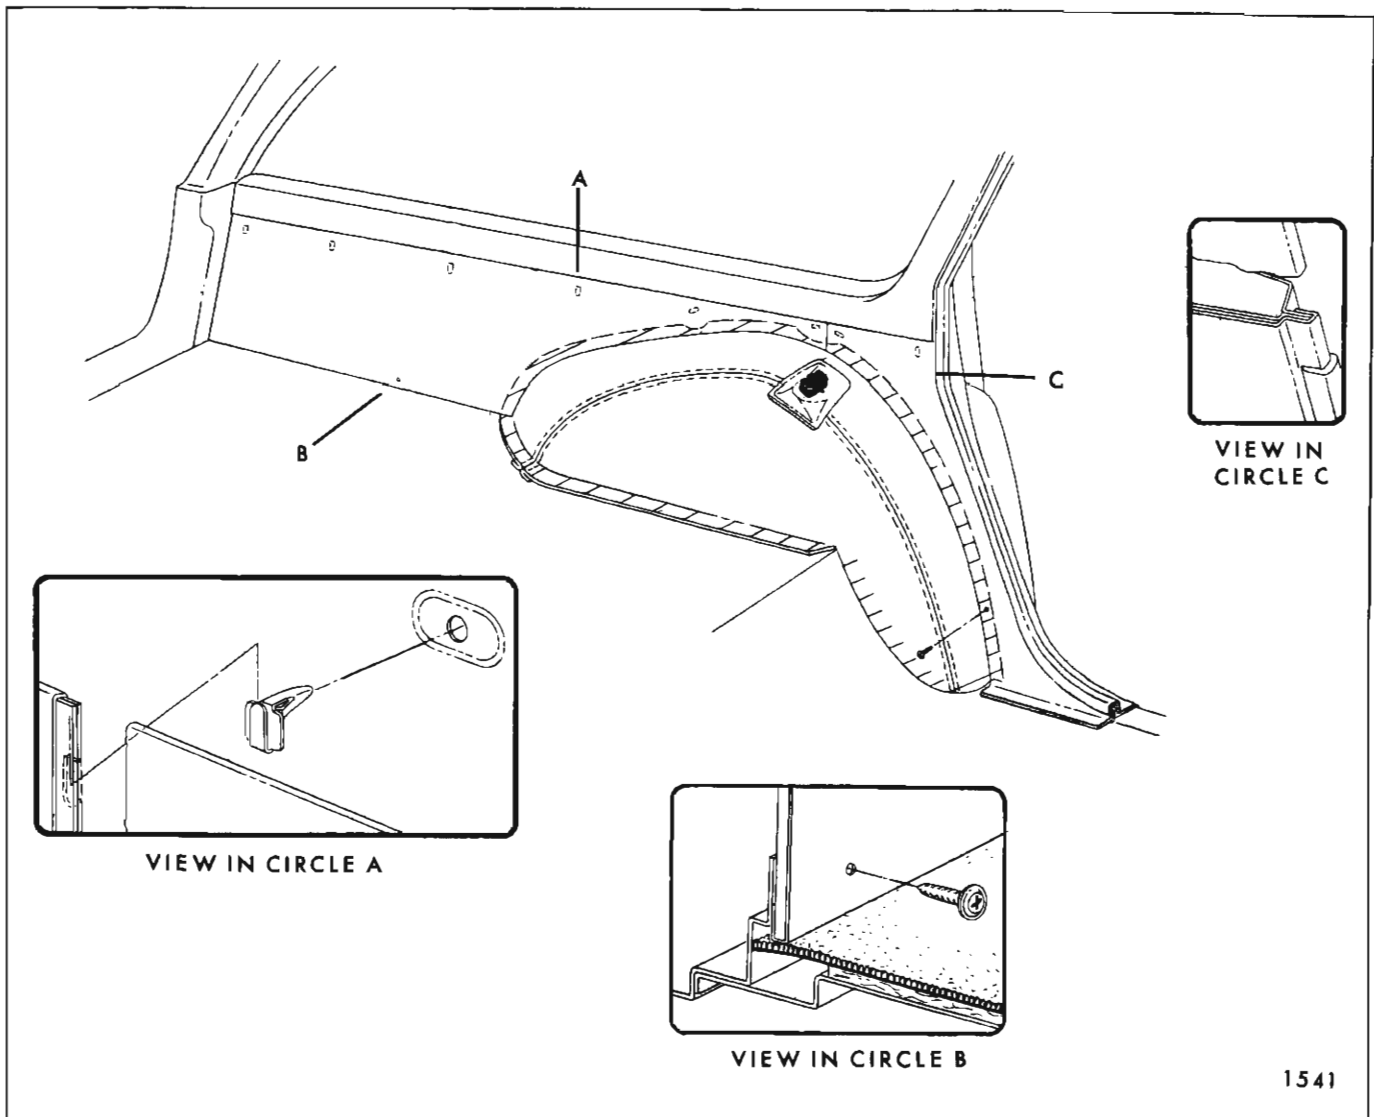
E8—Rear Quarter Trim Installation - Left Side
